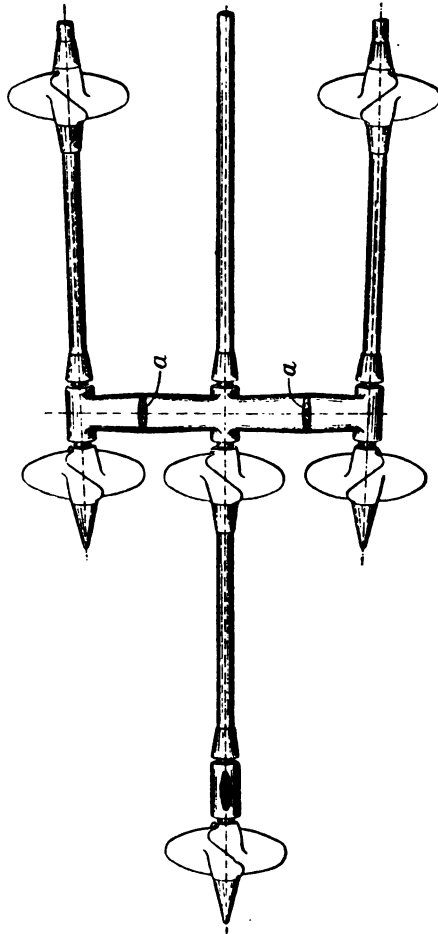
Propeller-shaft Support of Parsons and Wass: Sectional plan.
